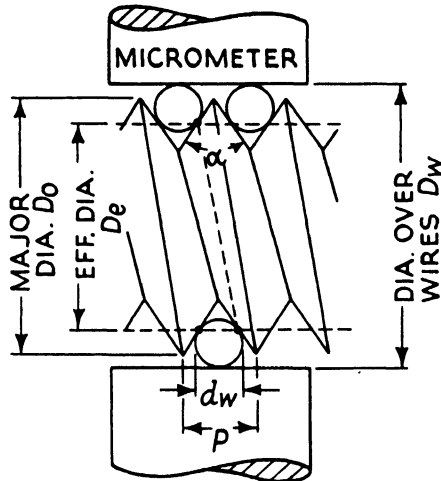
ILLUSTRATING THE THREE-WIRE SYSTEM, USING BEST SIZE WIRES
